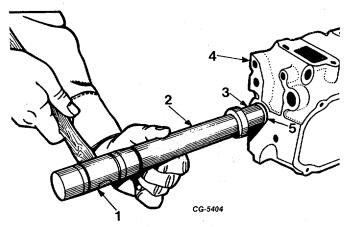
Installing Cylinder Head Core Plugs Using Installer SE-1945 and Driver Handle SE-1581-1B
